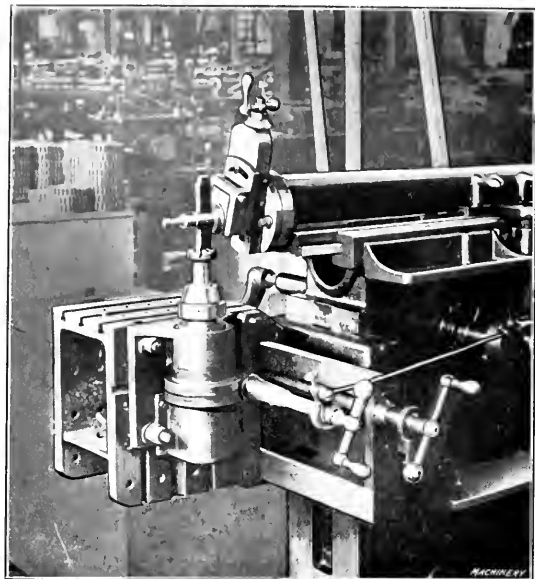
Shaper equipped with Fixture for generating Helical Clutch Teeth
